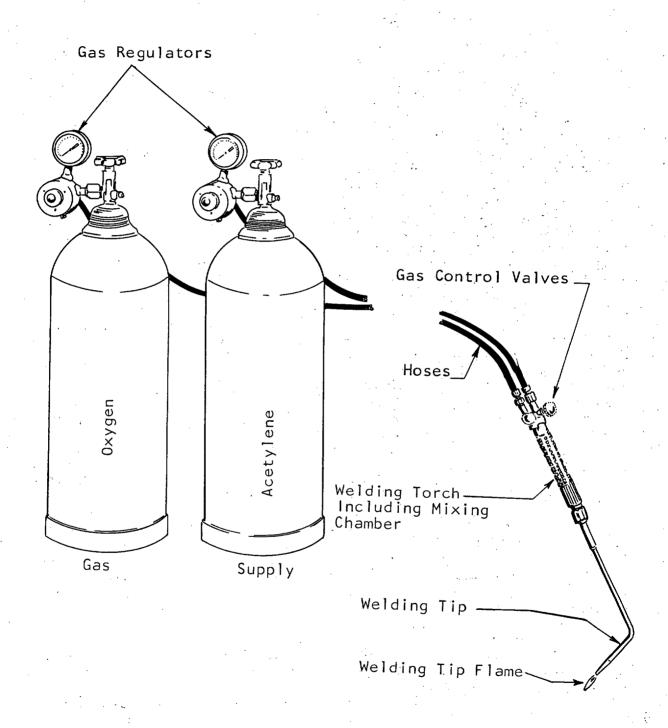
Oxyacetylene Welding Equipment
